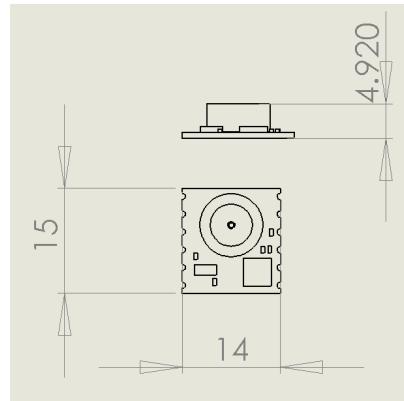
Mechanical dimensions (in mm) of module reference board containing CH201 and M0 MCU
